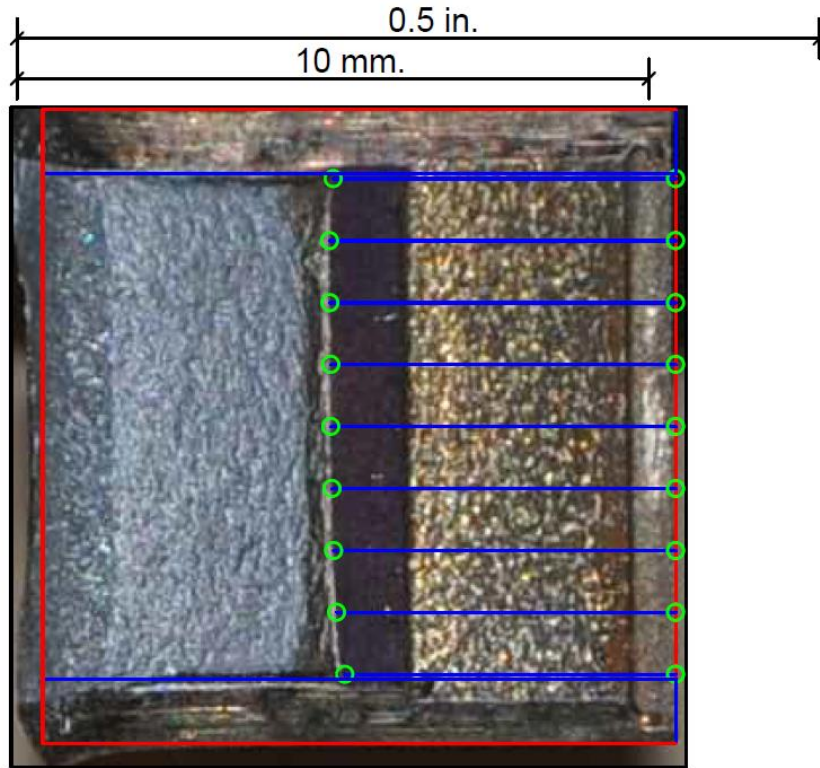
Specimen D12' Fracture Surface
